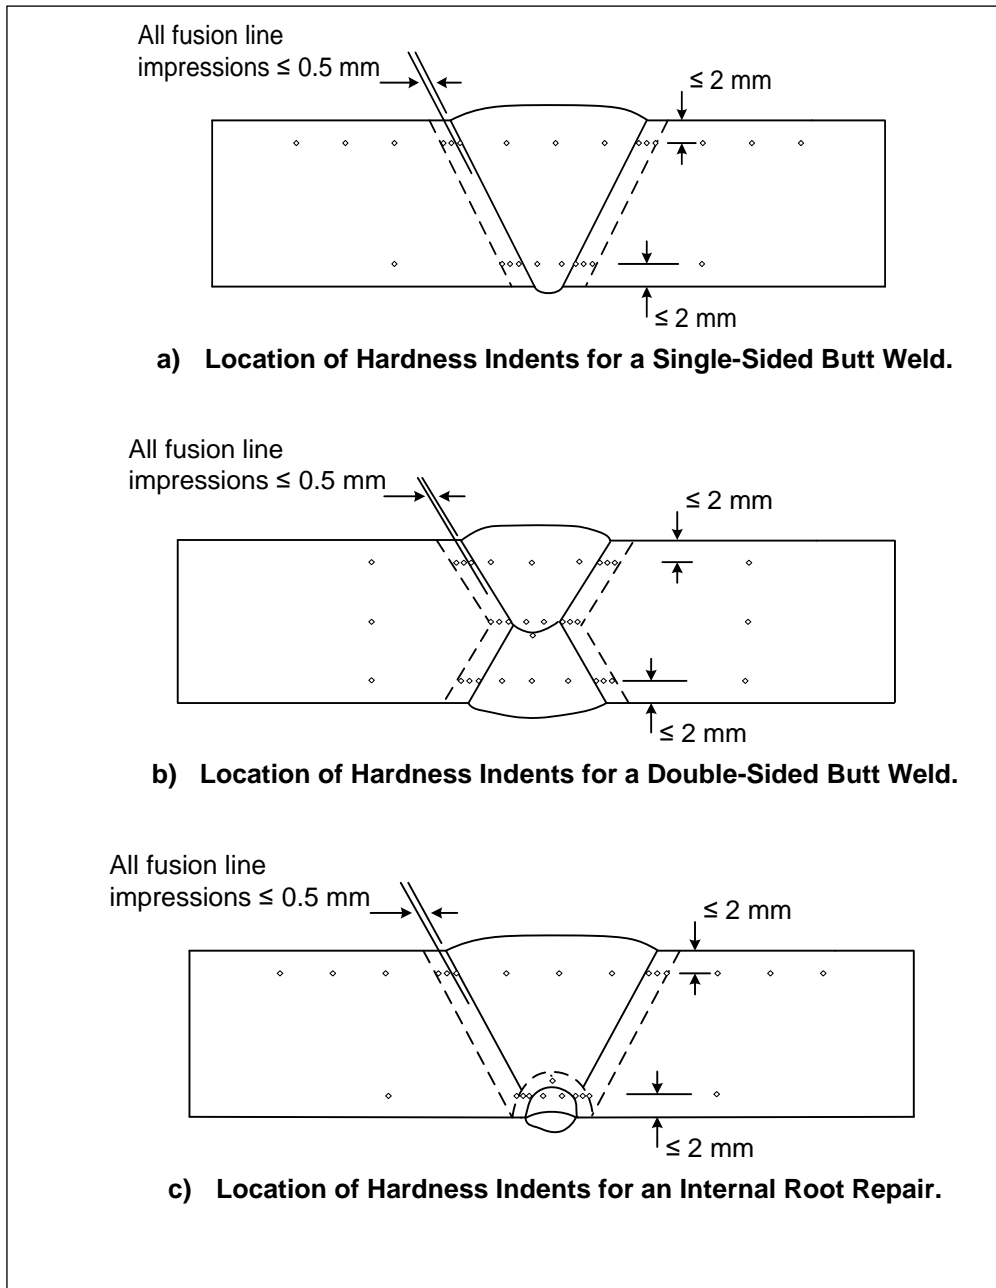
Location of Hardness Surveys for a Butt Weld.
